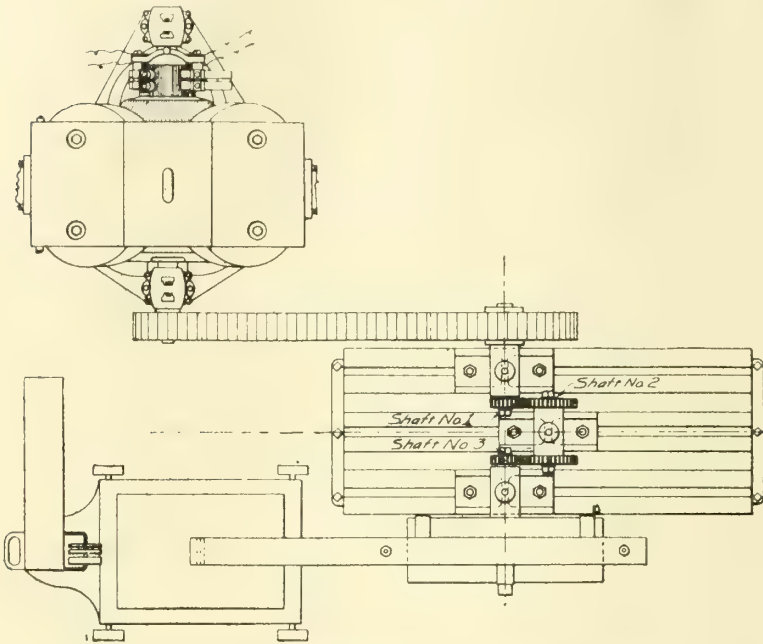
PLAN OF APPARATUS FOR TESTING GEAR WHEELS.
